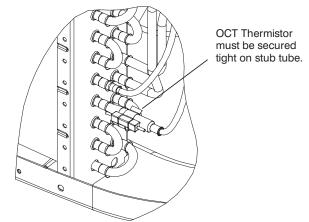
Outdoor Coil Thermistor (OCT) Attachment A05408 Start-Up
